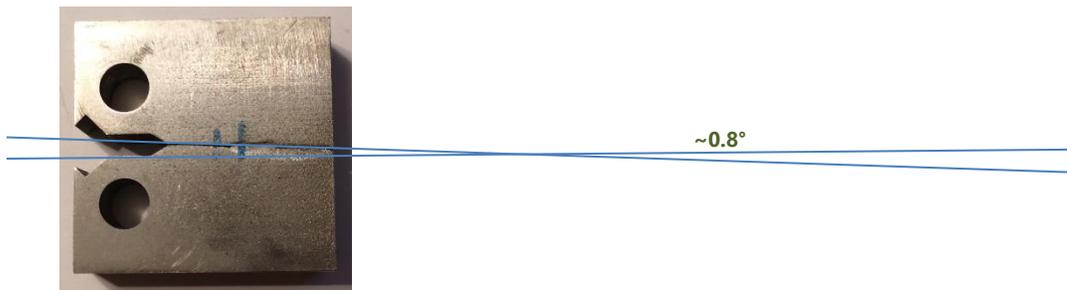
ANGLE OF FRACTURE SURFACE TO STARTER NOTCH IN KL3
